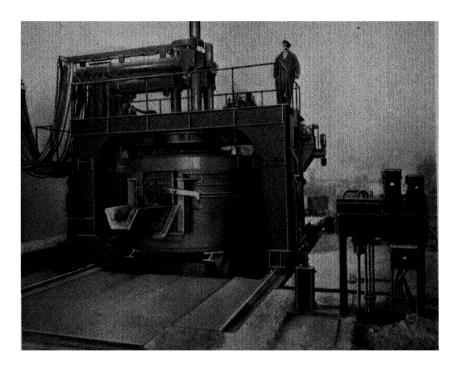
A 12-ton Siemens-Haiske are furnace with removable cover. (By courtesy of Siemens-Schuckert, Ltd.)
